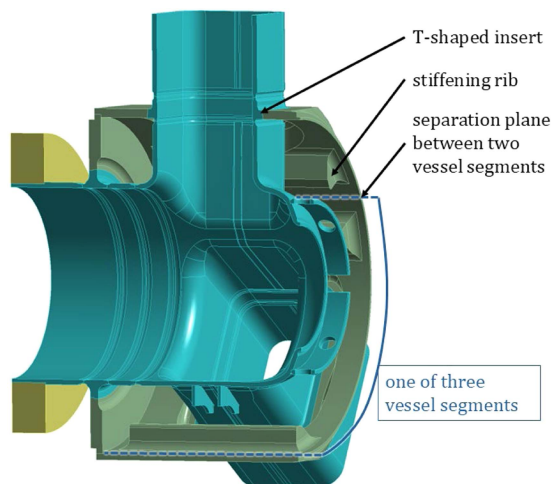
Cavity and vessel endgroup in cut view showing details of the vessel segmentation and stiffening ribs.
